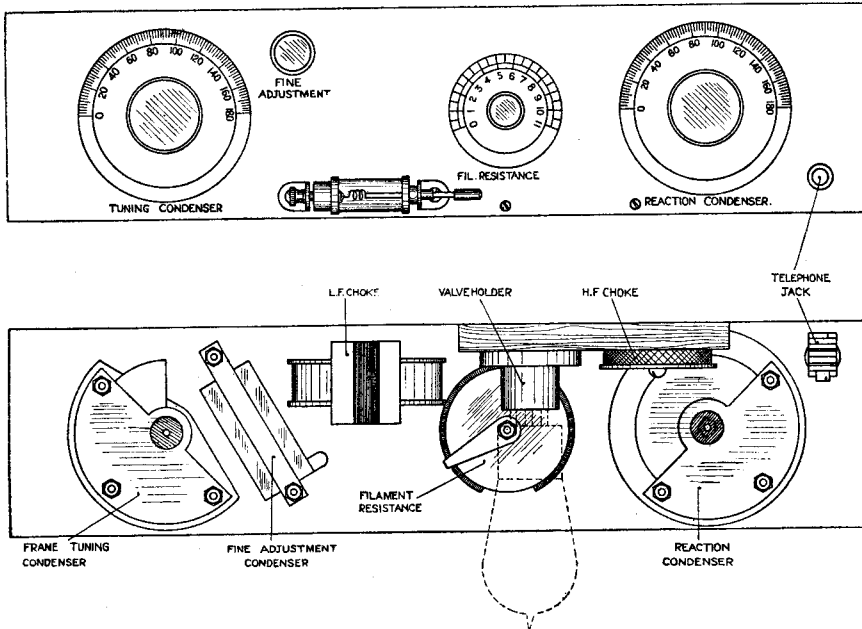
Front and rear views of the panel showing the dispositions of the components.
